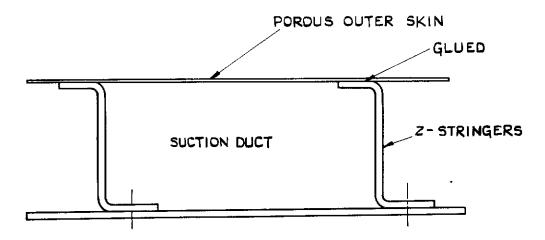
INVERTED STRINGER-SHEET CONSTRUCTION.
